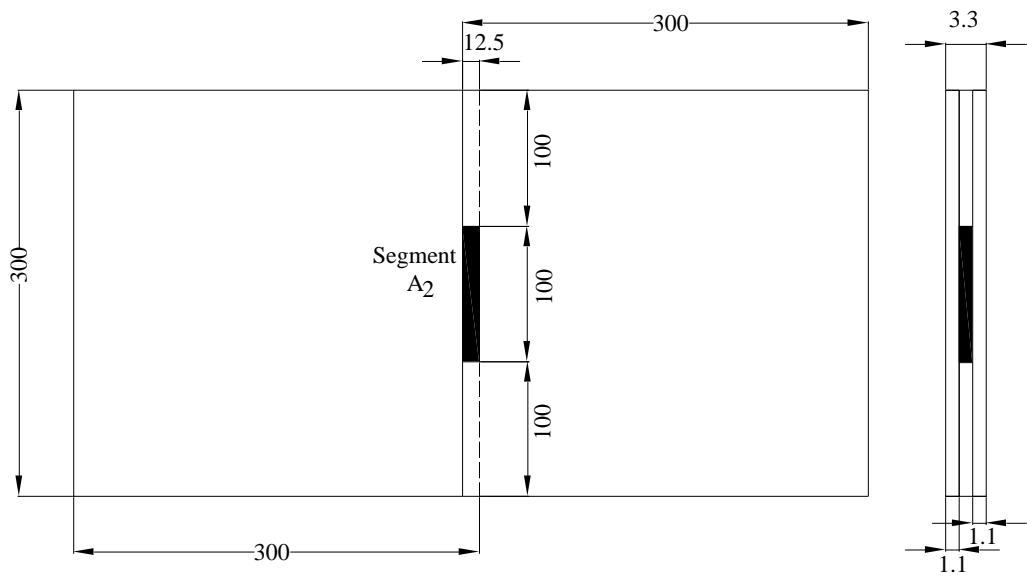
Geometric dimensions of plates with an adhesive lap joint (Case-4)
